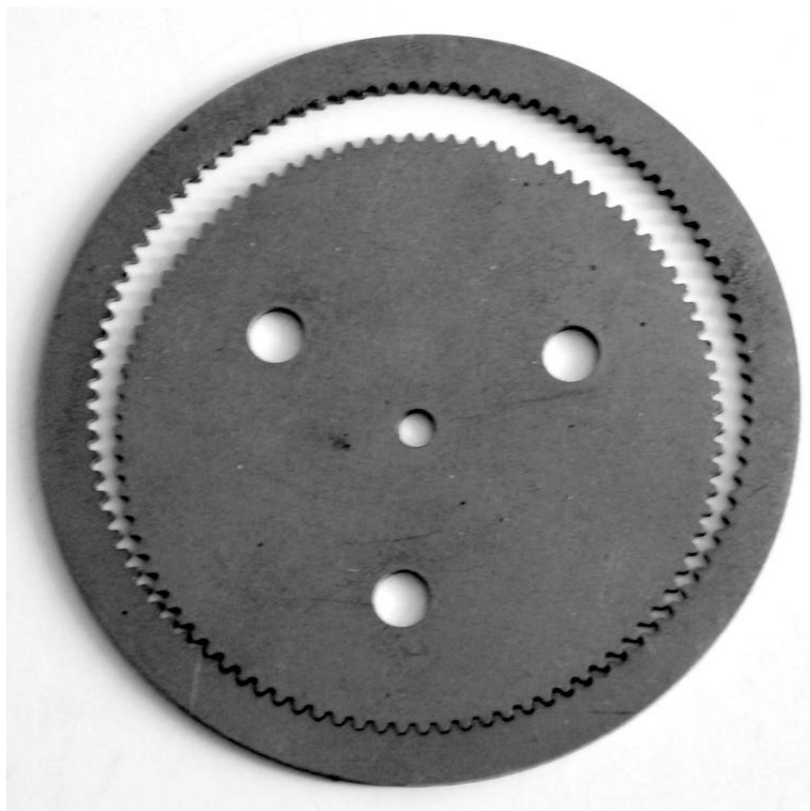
Assembly of wobble gear/output internal gear for the $\frac{1}{4}$ -turn Actuator.
